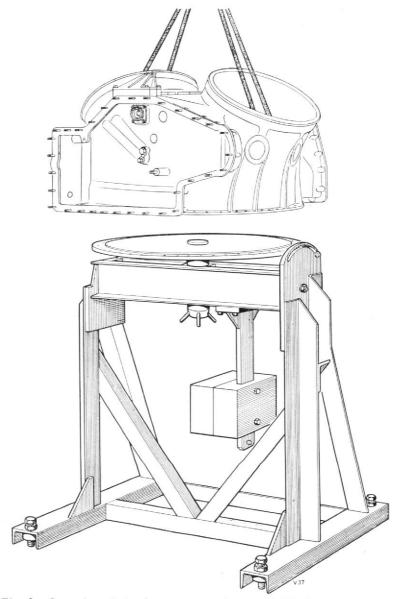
Lowering air-intake on to erecting stand T.72381, using sling T.70454.
